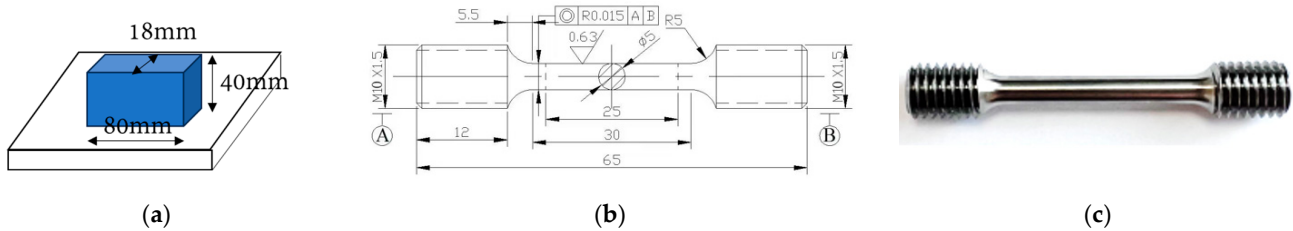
Tensile test samples: (a) sampling; (b) dimensions (unit: mm); (c) image.
